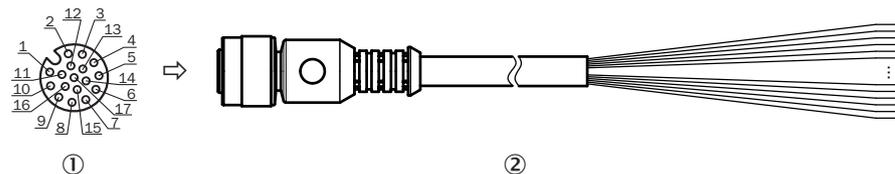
Adapter cable, e.g. part no. 2070425 (3 m)
